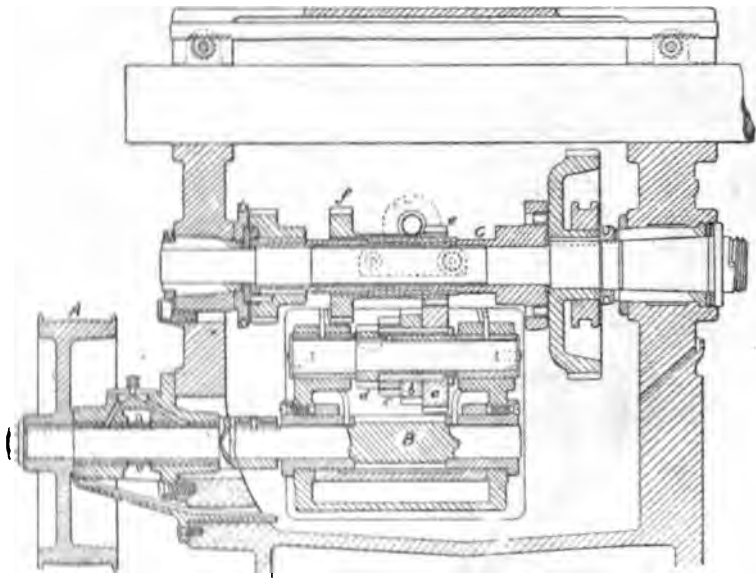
Vertical Section through Main Spindle, No. 2 Universal Machine.
